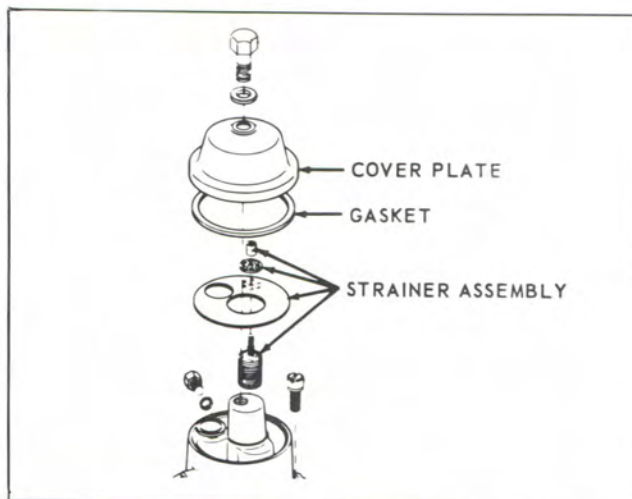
Fuel Pump Cleaning Strainer Assembly
